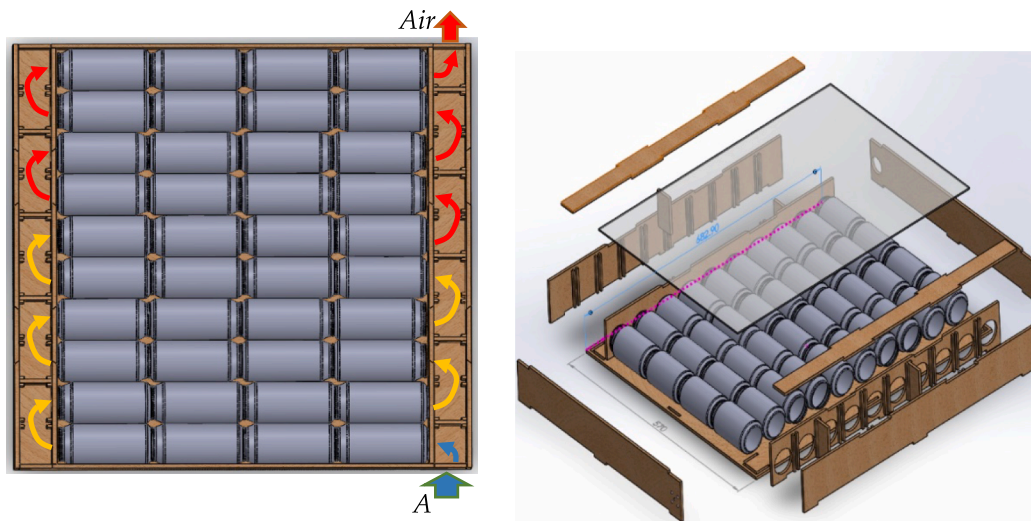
(a) Ten-pass air heater configuration (b) Exploded view of system frame and aluminium cans arrangement.
